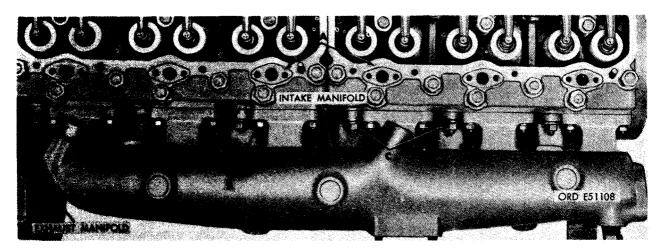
DISCONNECTING OR CONNECTING INTAKE AND EXHAUST MANIFOLDS AT CYLINDER HEAD ASSEMBLIES - TOP VIEW.
